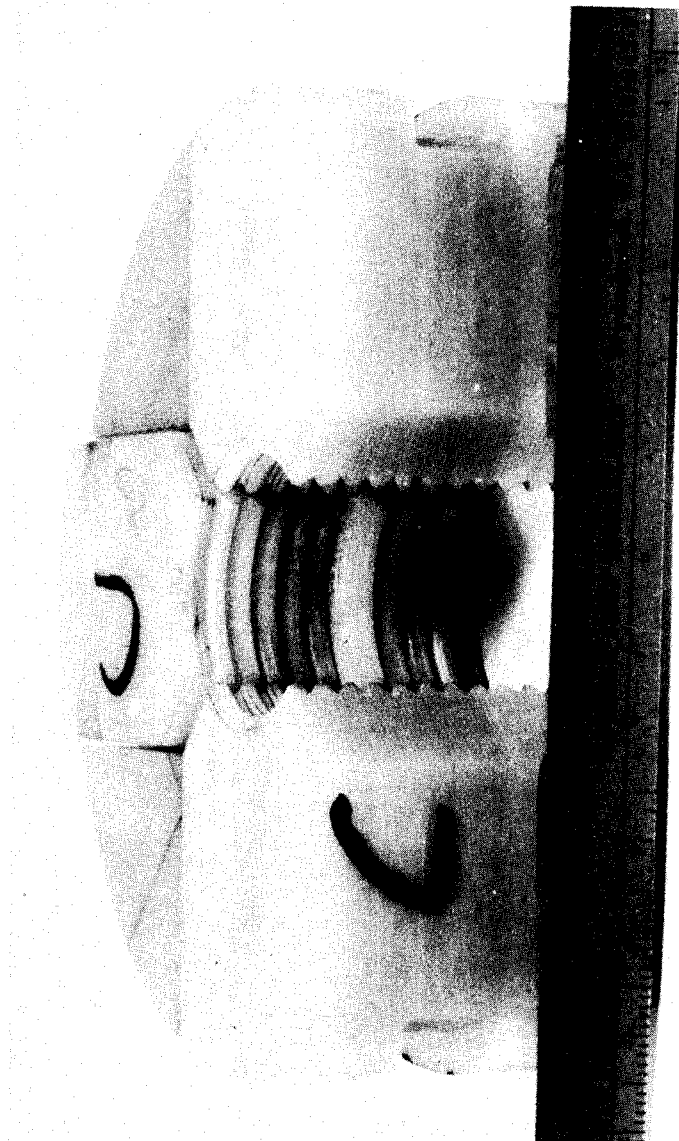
SPECIMEN ASSEMBLY FOR SABOT LUG SHEAR TEST
